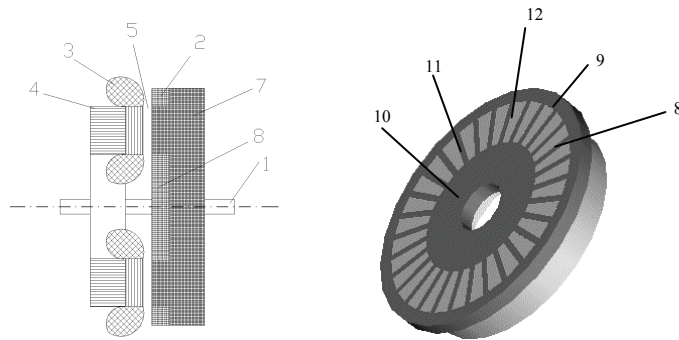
AF motor and the rotor of the motor studied in this work in which there is a shaft (1) rotating with respect to the machine frame, and a rotor (2) supported to the shaft. A stator (4) is supported to the machine frame and comprising a stator winding (3). An air-gap (5) is between the rotor (2) and the stator (4). (7) is an element that conducts the magnetic flux, the element is the rotor yoke (7). The rotor yoke (7) is fabricated from ferromagnetic solid steel. The rotor frame plate (8) (the "cartwheel") is machined of work-hardened, rolled sheet of suitable aluminium alloy. The rotor frame (8) is comprised of a uniform inner periphery (10), an outer periphery (9) and conductor bars (11). Between the inner and outer peripheries of the rotor there are ferromagnetic pieces (12).
